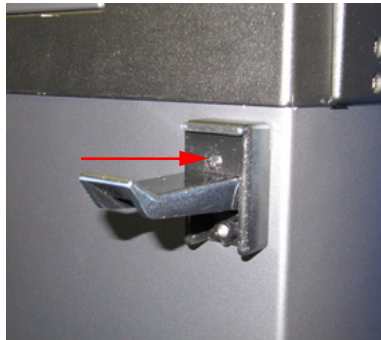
Front Foot and Mounting Bracket Remove/Install
